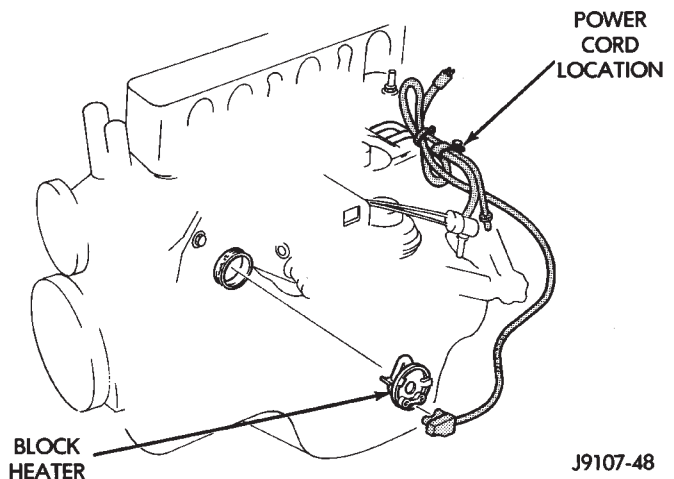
Heater and Cord—XJ with 2.5L 4-Cylinder Engine
